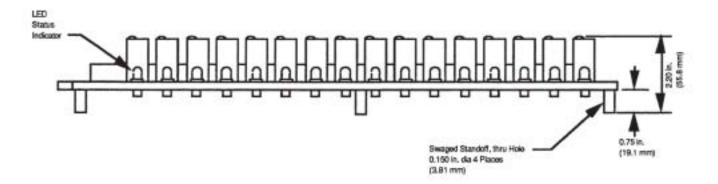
473.36c-0X Motherboard Mounting Dimensions
